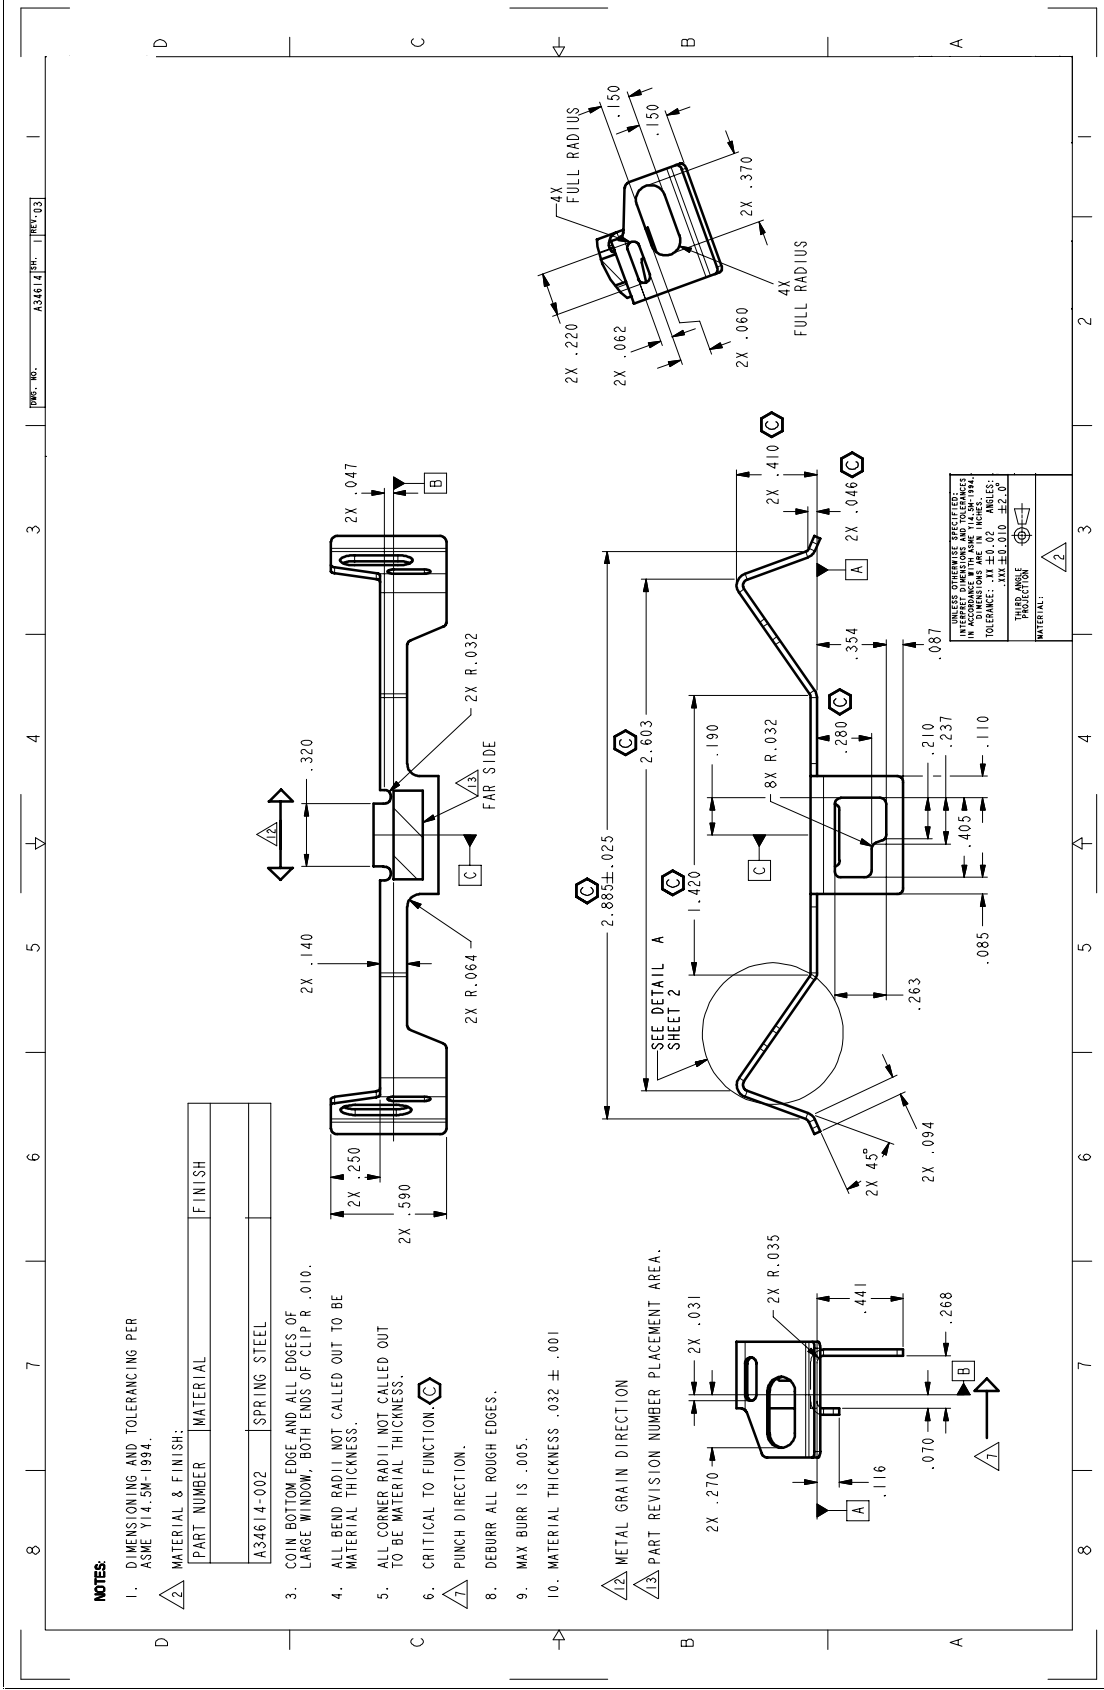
Enabled Heatsink Clip for INT-mPGA Package (Sheet 2 of 2)
